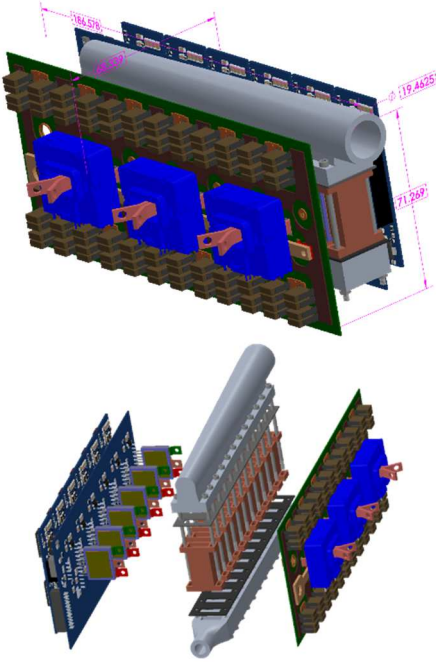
3D drawing for a 100 kW segmented inverter design (top), exploded view (bottom).
